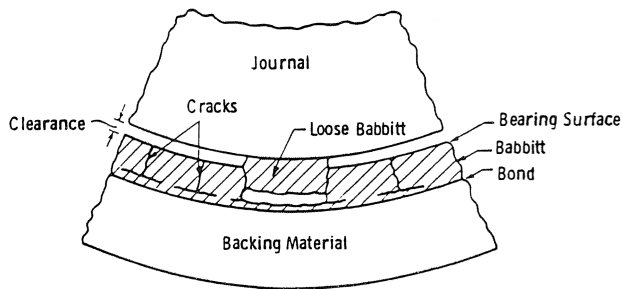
Sketch Showing Babbitt Fatigue Initiating Wiping Damage.
